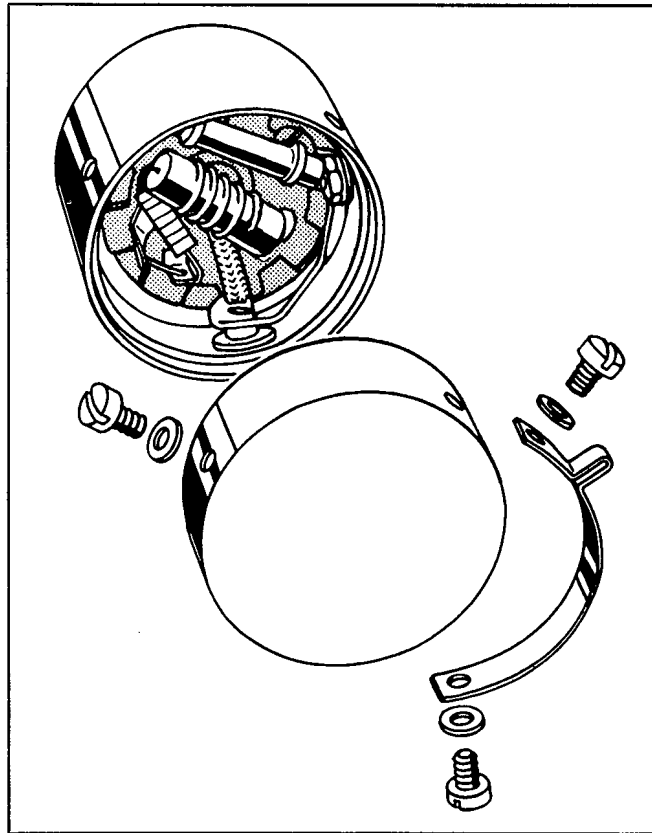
Disassembly of Lighthouse Tube Sockets in Monitor Receiver
